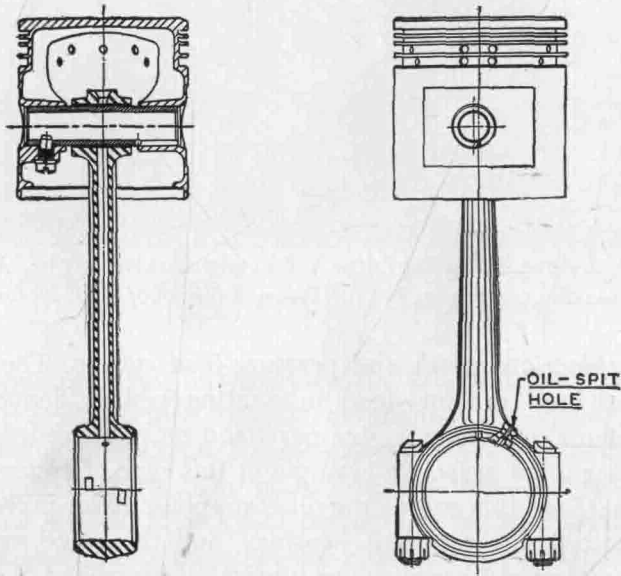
Sectional view of a connecting rod and piston, showing oil hole to lubricate piston pin and oil-spit hole to lubricate cylinder wall. (Oldsmobile Division of General Motors Corporation)
